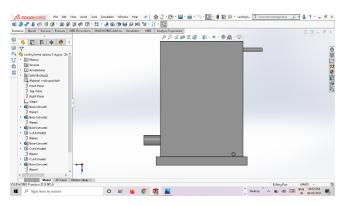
(i)Air inlet Pipe at 0⁰- Cooling Tower Model
